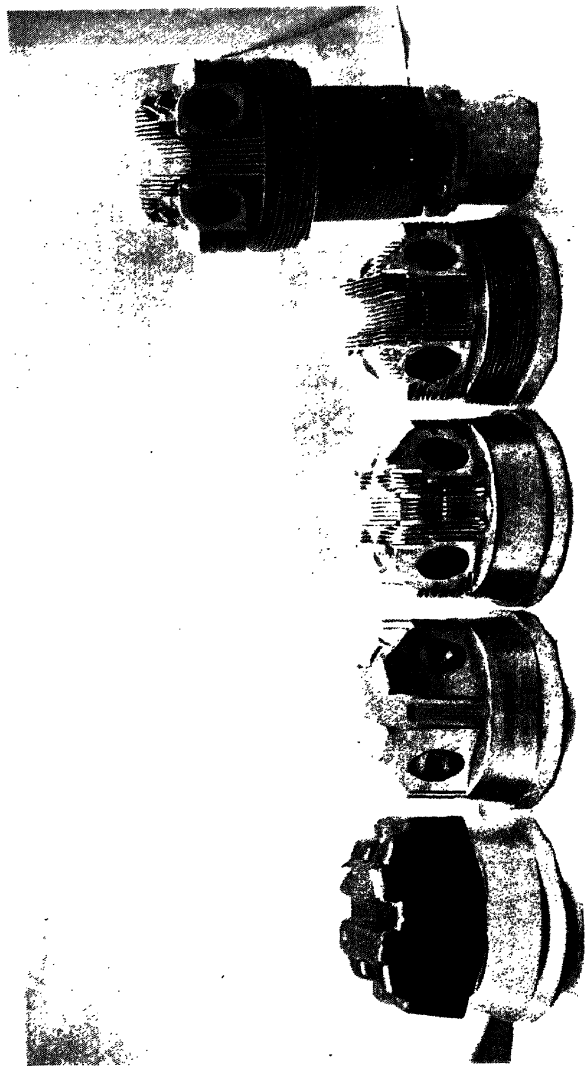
Showing various stages in the manufacture of a Bristol aluminium alloy cylinder head from the forging shown on the left.
